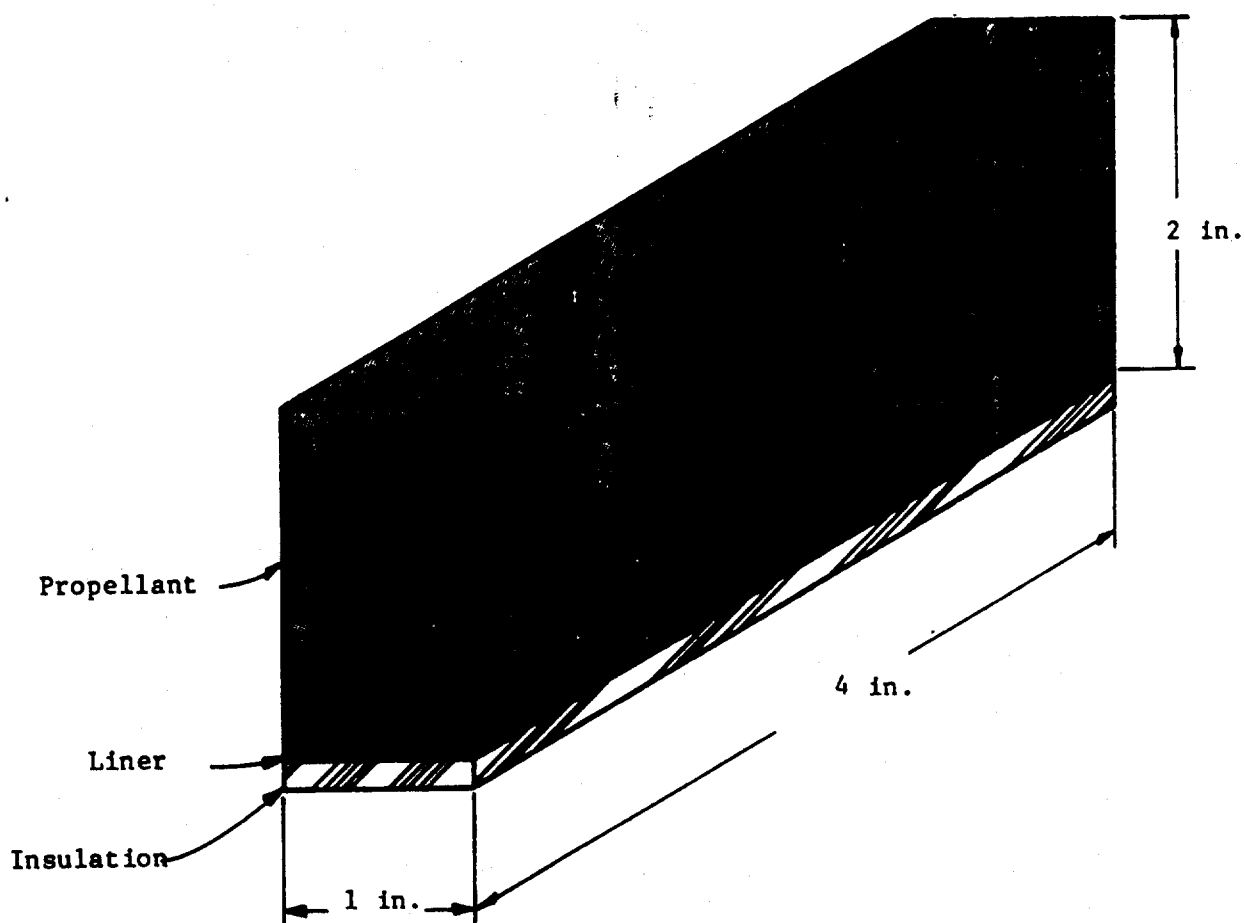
Milled or Saw-Cut Scarf-Joint Specimen
